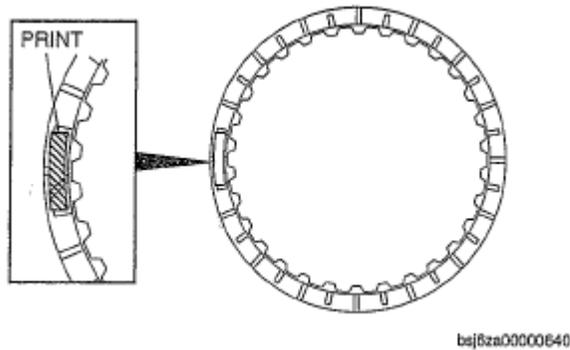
Identifying Print Mark On Drive Plates (C1)
